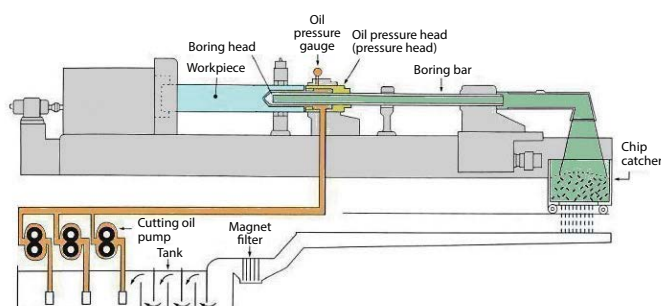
Schematic diagram of a BTA deep hole drilling machine³⁾
